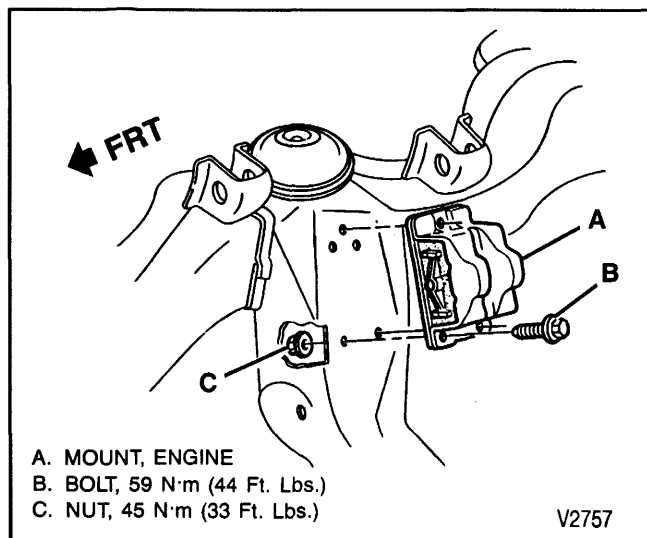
Front Engine Mounting Brackets to Frame (C-Models)
